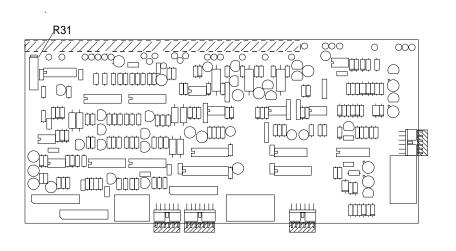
A23 Multiband Controller PCB (54154A thru 54177A)
